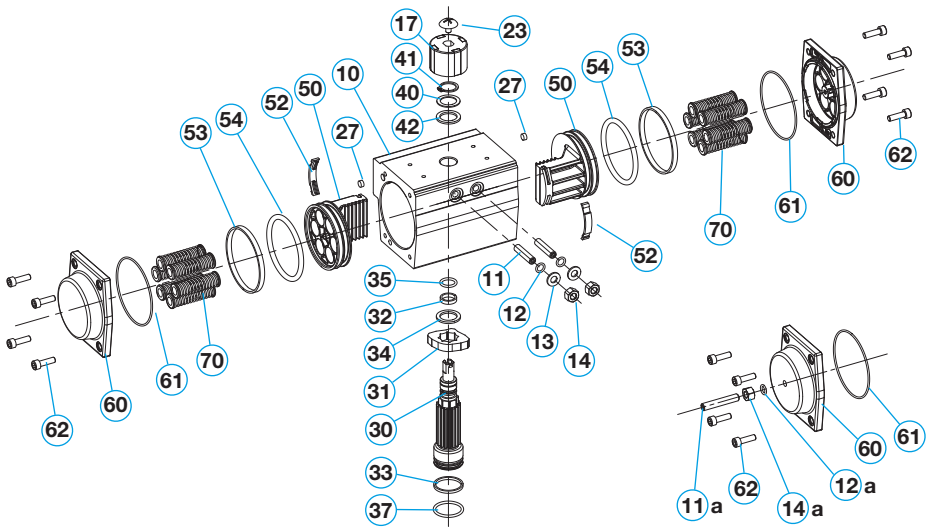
Exploded-view drawing of all individual components of rotary actuator
